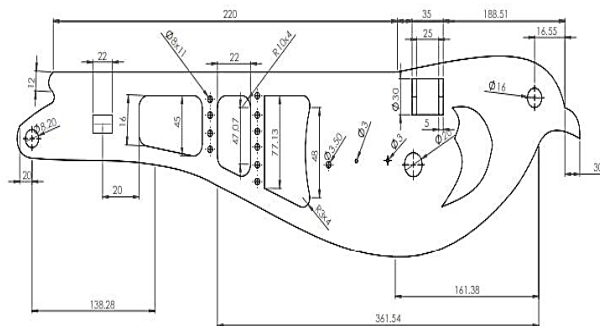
Solidworks Drawing of Fuselage with Dimensions, Fig 2b: Finished Fuselage and Gear Plates
